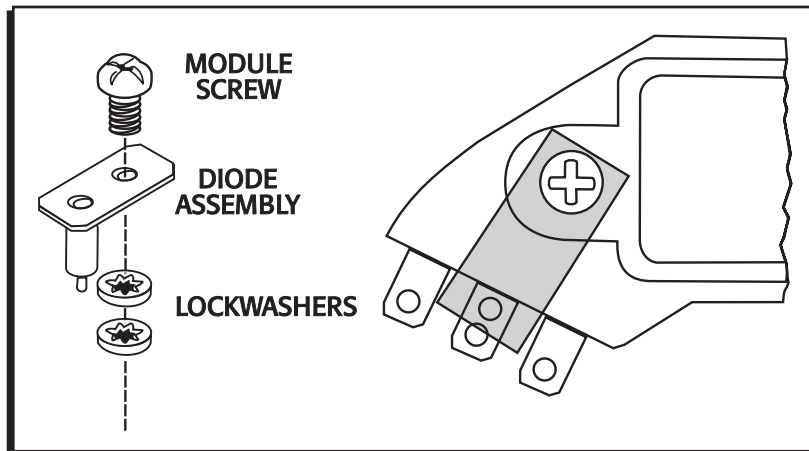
Installing the Diode Assembly with a 5-Pin Module.
